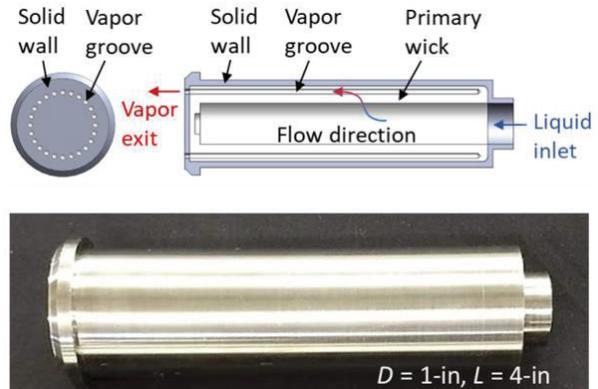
(top) CAD rendering of the 3D printed evaporator, and (bottom) a photograph of the 3D printed evaporator.
